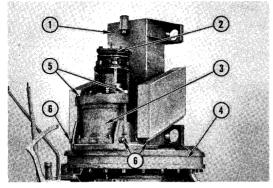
STEERING TRUNNION ASSEMBLY
